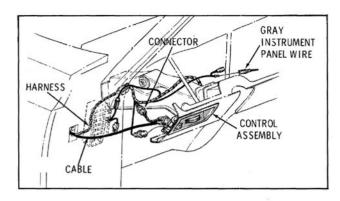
Control Assembly Wiring (30, 31 & 32)
